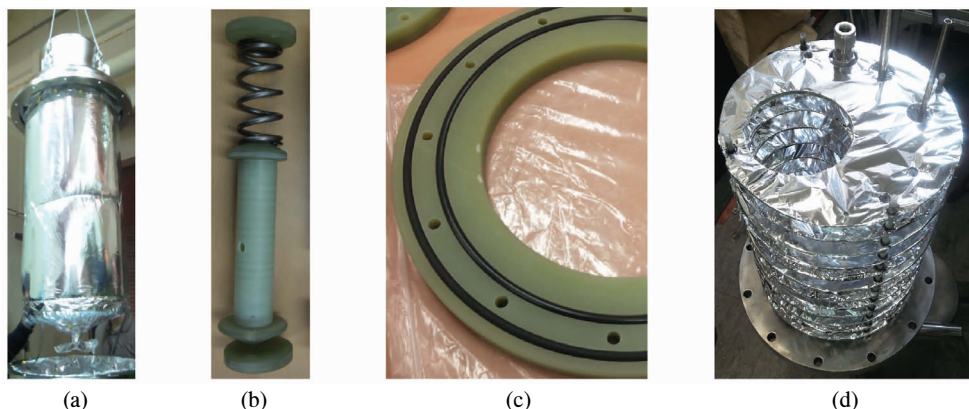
(a) MLI wrapping of inner tank. (b) G-10 CR MLI wrapped baffle assembly (c) G10-CR machined disk (d) G-10 CR support structure.
